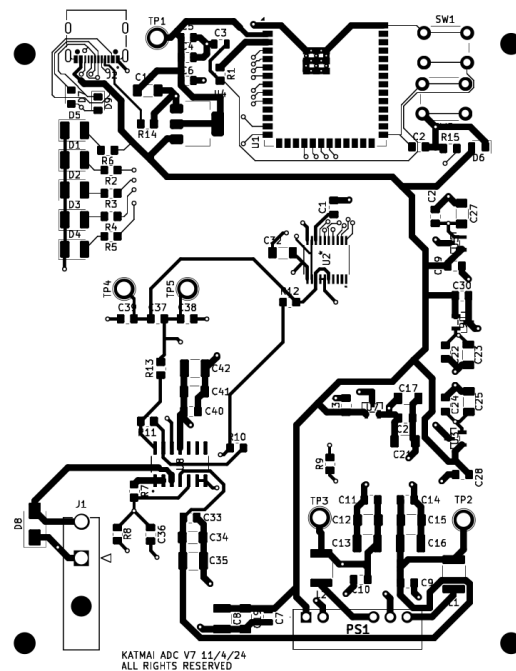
PCB Layout for Katmai ADC showing component placement and routing considerations.
